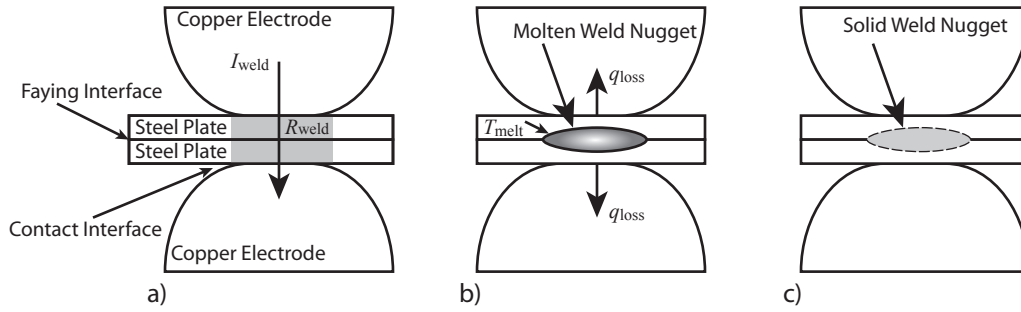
a) Initial welding stack when welding current I_{weld} is applied to the workpiece with resistance R_{weld} shown in light gray. b) The workpiece with a molten nugget when welding current is removed at t_{weld} s. Heat flux q_{loss} cools the workpiece. c) The workpiece after solidification of the molten nugget. The outline of the previously molten zone is shown in light gray.
